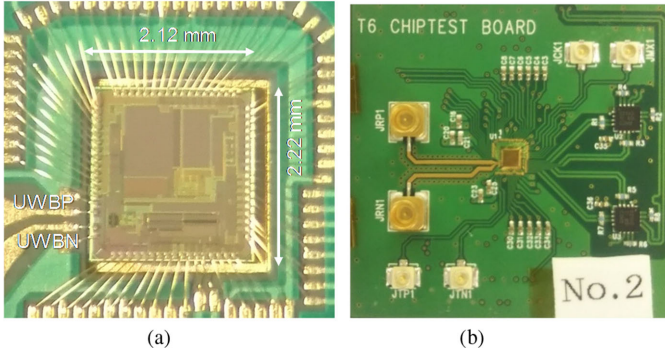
(a) Photomicrograph of CMOS-LSI after wire bonding. (b) Photograph of RF board on which CMOS-LSI is assembled.
